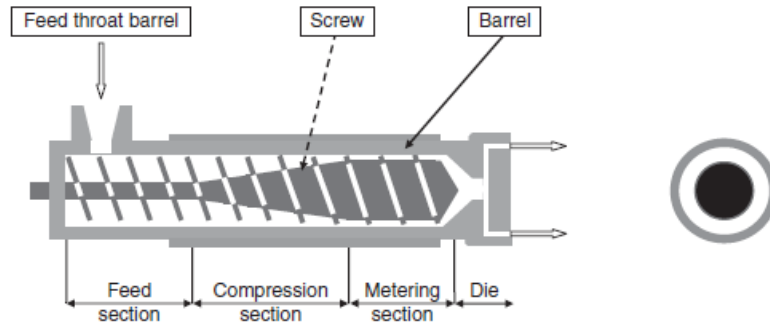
Schematic view of a 'monobloc' one-stage single screw extruder [69].
